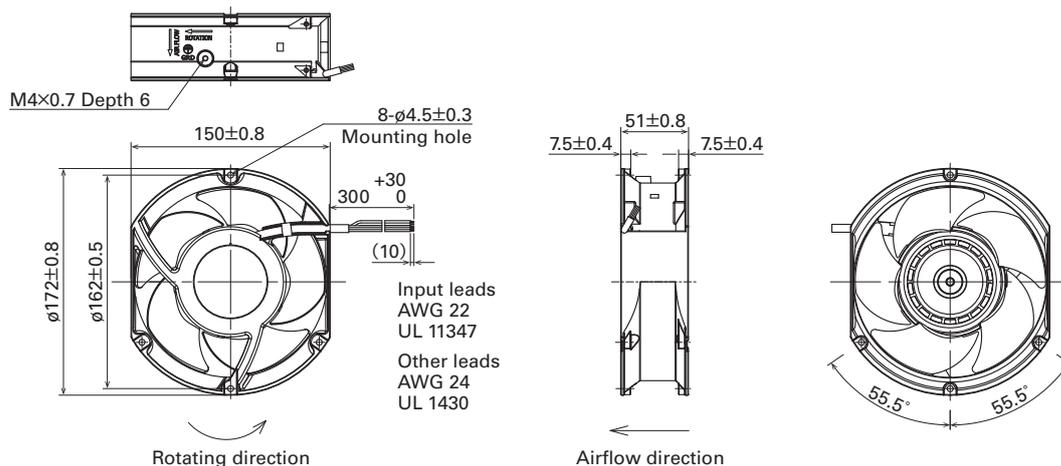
Dimensions of the *San Ace 172AD 9AD* type (Unit: mm)
